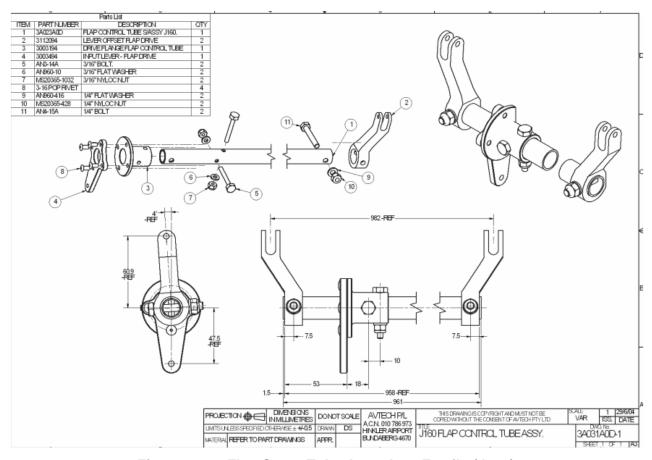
Flap Cross Tube Assy J160 Family (J160)
